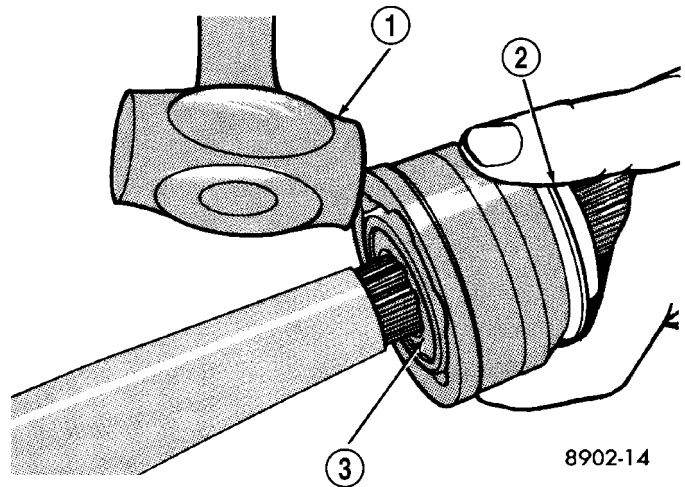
Outer C/V Joint Removal from Interconnecting Shaft
